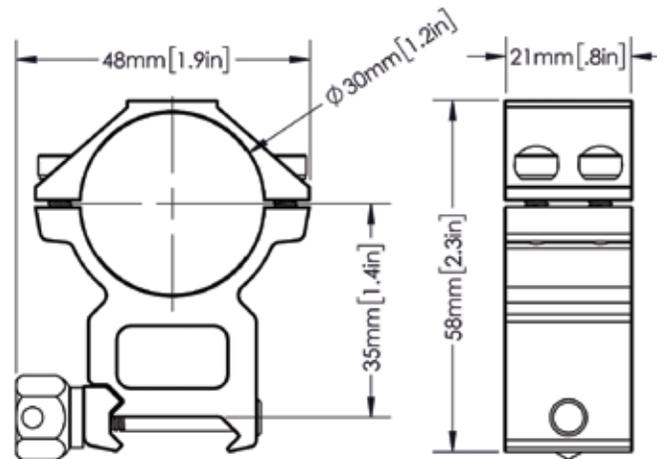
IRAY-AC18: BOLT Standard Scope Mount Rings
